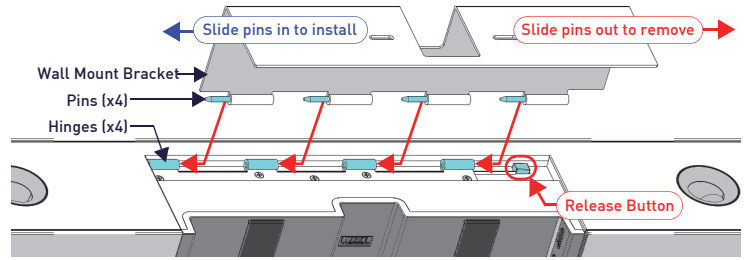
ACV-5100 BOTTOM VIEW - REMOVING THE BRACKET
